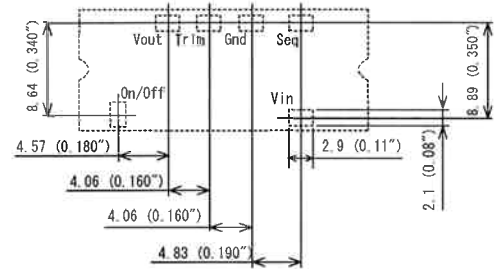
Recommended PWB PAD LAYOUT (Top View)
